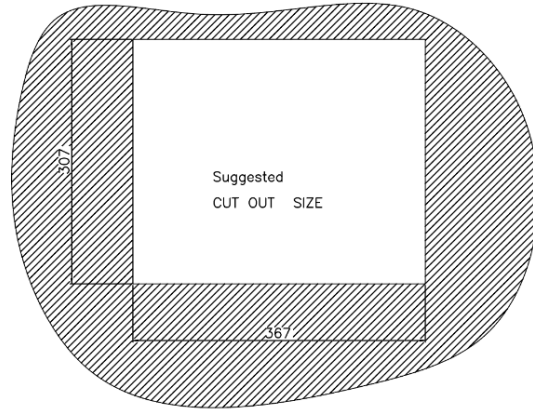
DM2-170H(L) Cutout Dimensions (Unit: mm)
